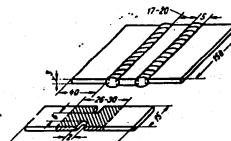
Preparing a continuous specimen for the testing of weld metal
